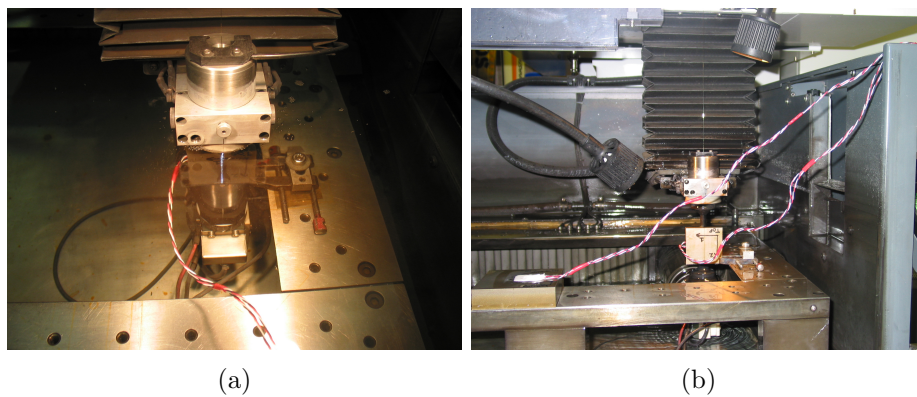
Slitting test: (a) cutting process and (b) EDM machine and clamping fixture
